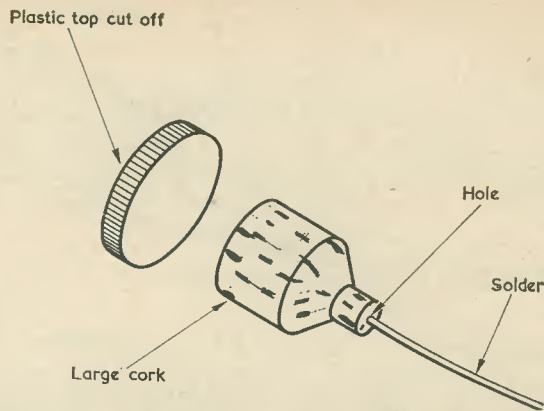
A simple solder holder which enables odd bits of solder to be finally used up
